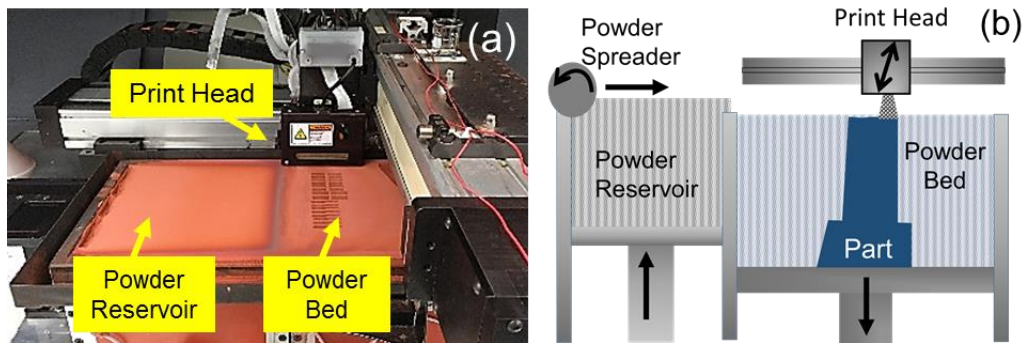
(a) The print head of the ExOne R2 printer; (b) the sketch of binder jetting.
